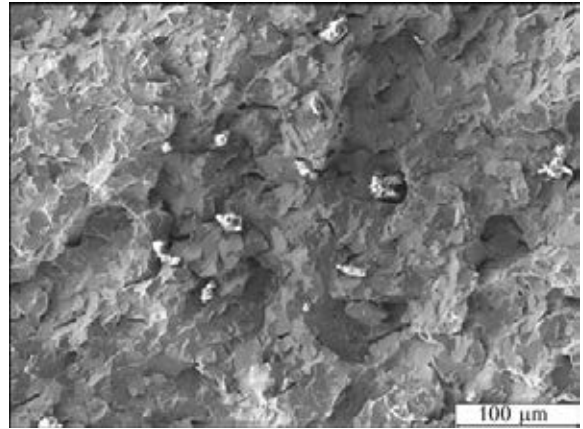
Refractory of non-metallic inclusions on fracture surface of rail welded joint
